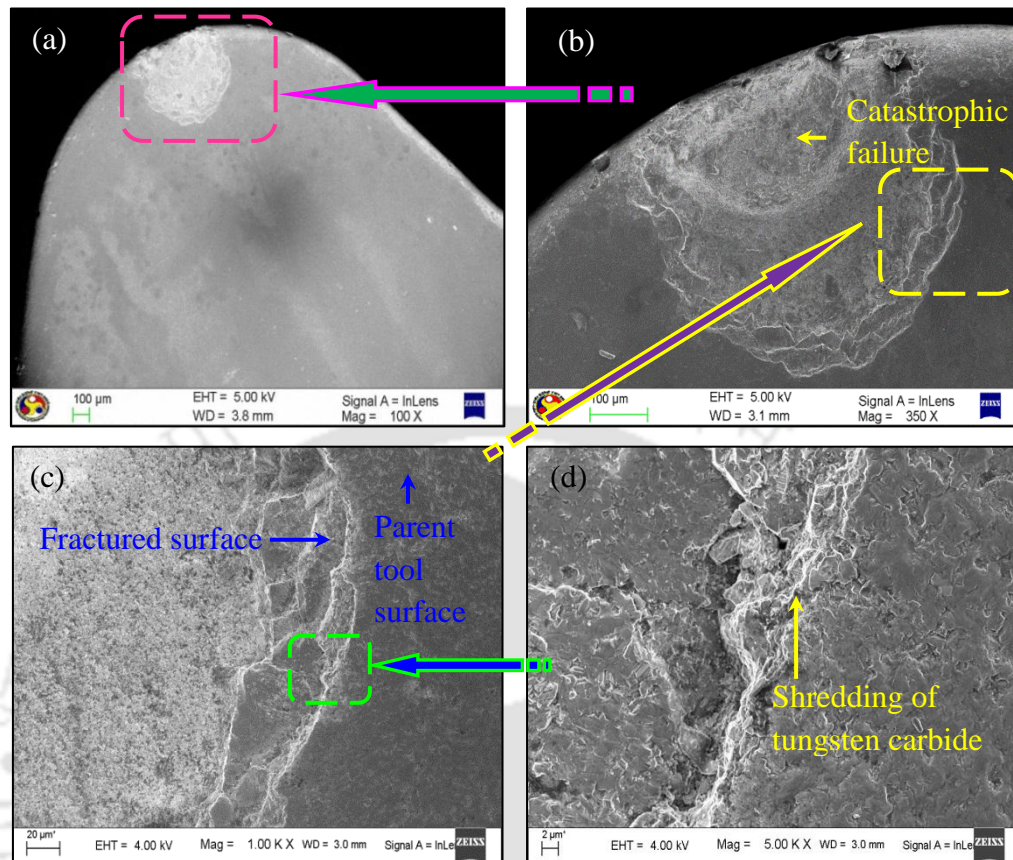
Surface morphology of un-textured tool after 900 seconds of machining (a) rake surface morphology, (b) crater wear formation, (c) fractured surface and (d) shredding of tungsten carbide
